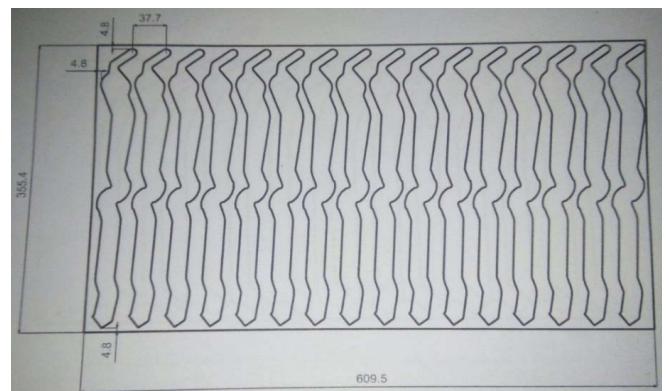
Propeller Shaft Guard for Right Hand (RH) [5].
